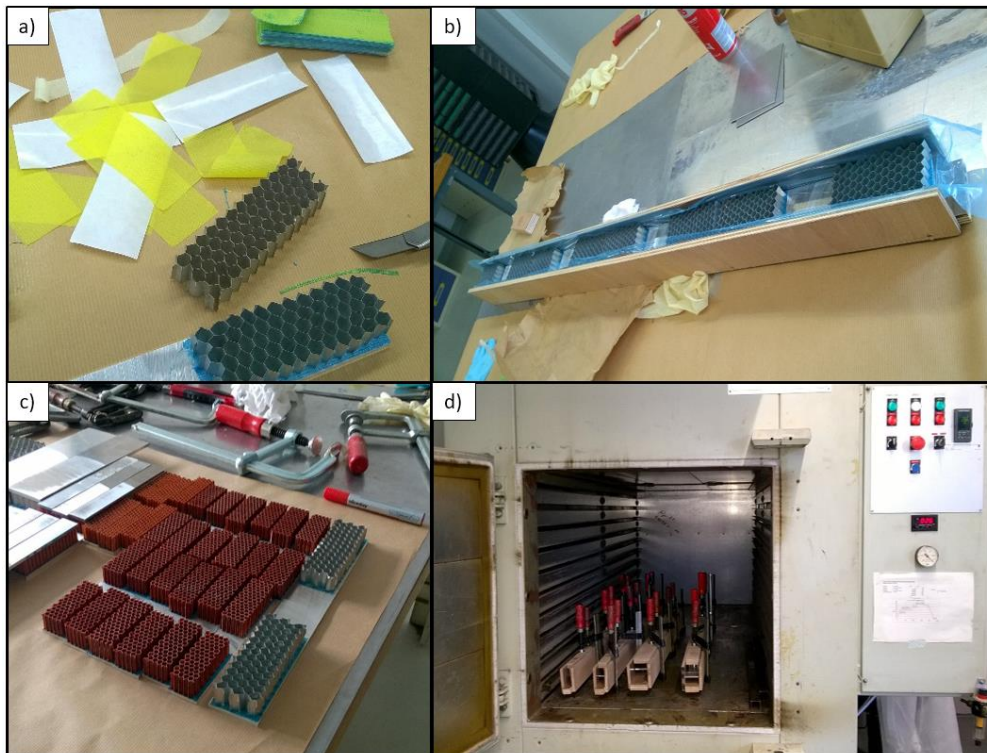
Assembly of the test specimens, b) specimens in the molds c) specimens ready for the second curing process, d) molds in the oven.
